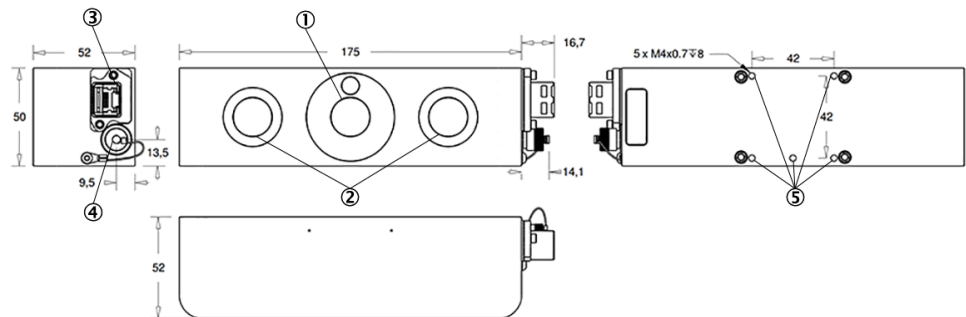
Ensensio N36 camera dimensional drawing (not true-to-scale)
